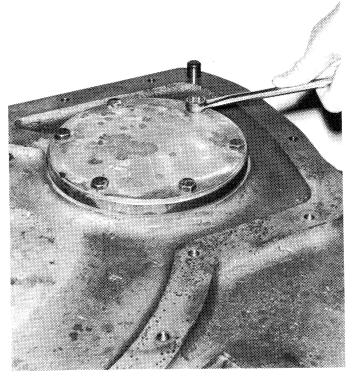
Removing or Installing Reverse Shaft Cover.
